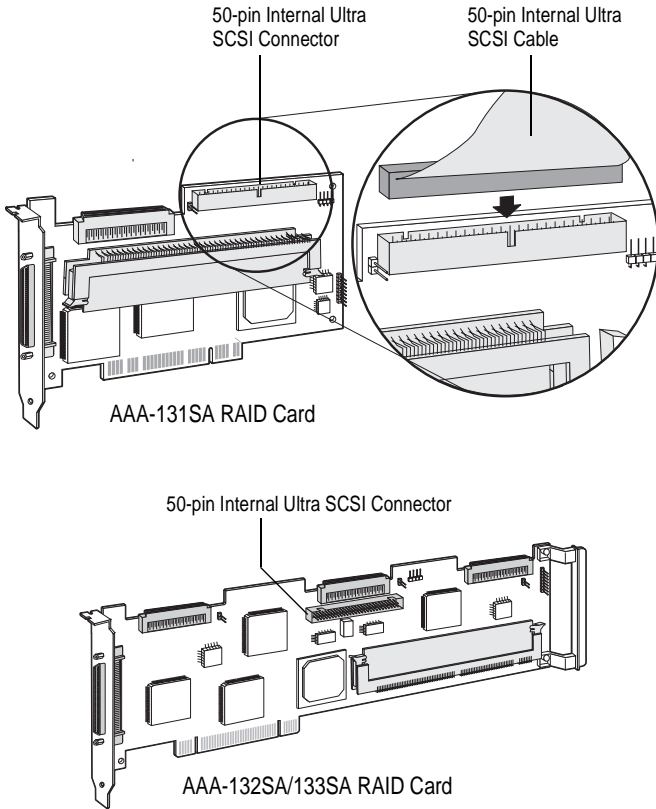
Connecting Cable to 50-pin Ultra SCSI Connector
